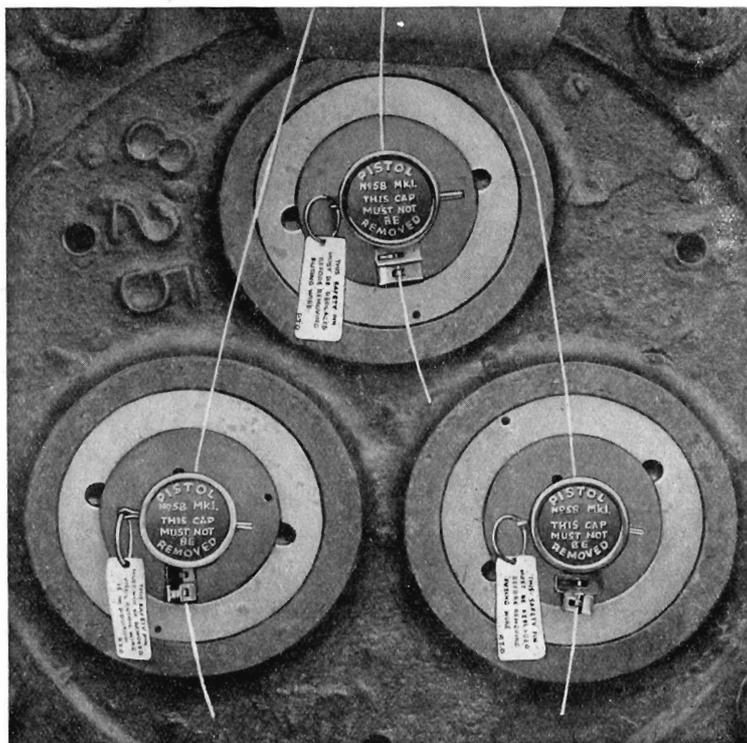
View showing rear end of bomb body after completion of fuzing operations
